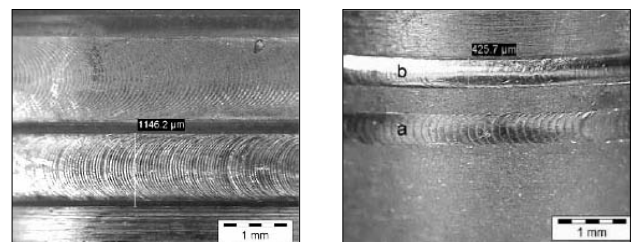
Applications of laser pulse shaping in seam welding. (left) Comparison of visual appearance of an I-seam weld (1.4435 material, 1 mm thick): upper seam weld CW Nd:YAG laser; lower seam weld pulsed Nd:YAG laser with “ripple pulse” shaping. (right) Seam weld with a pulsed Nd:YAG laser by using a pulse form with a falling edge. a) thermal pulse. b) combination of a “thermal pulse” and a “ripple pulse”.
